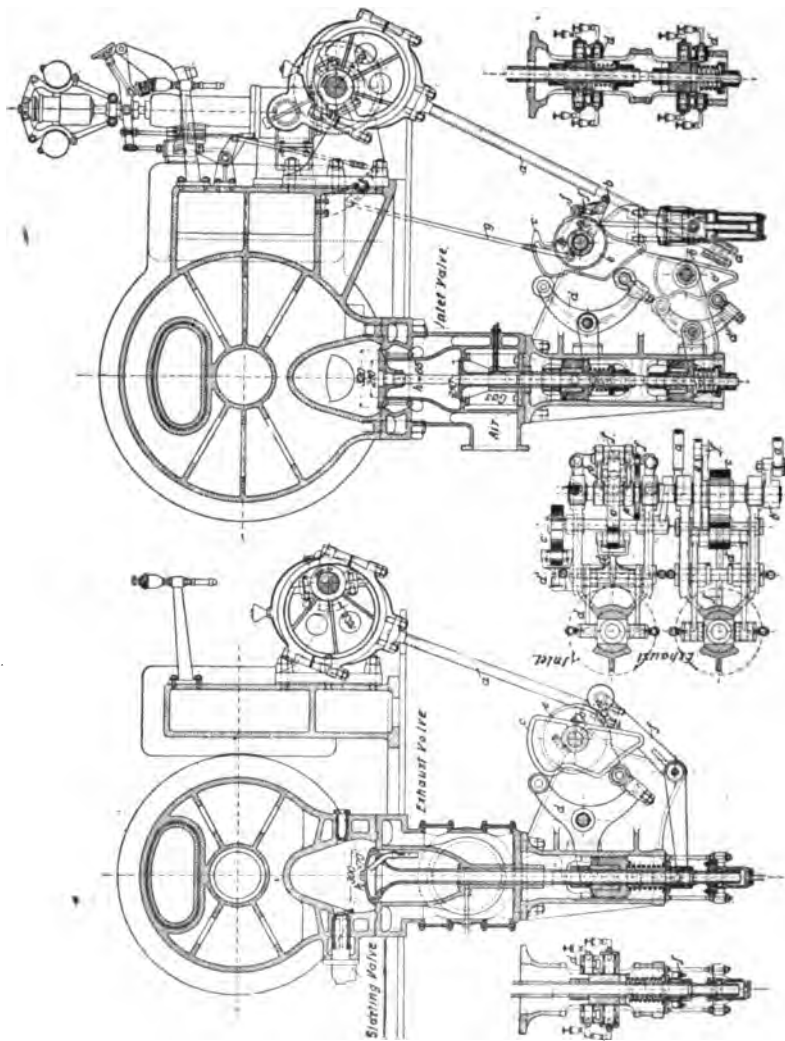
Valve Gear Details of Cockerill Double-acting Tandem Engine.
